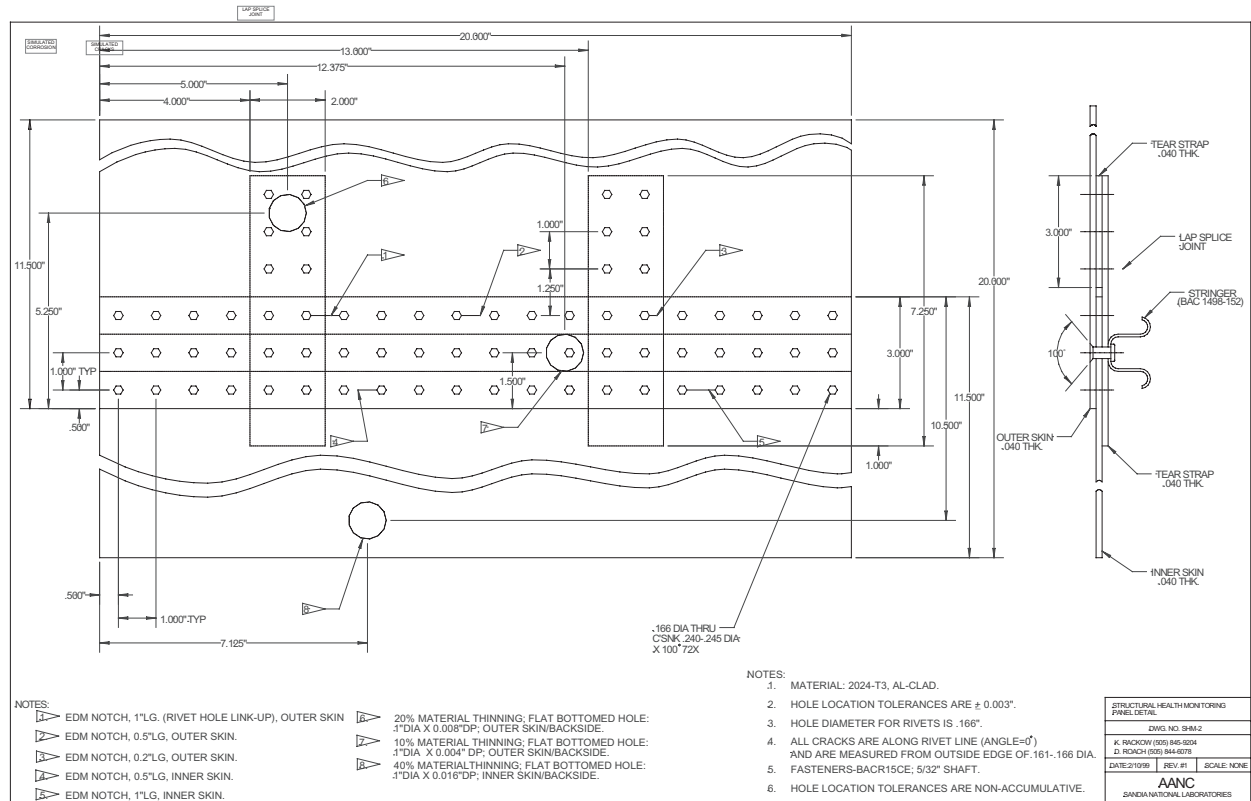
Realistic aging aircraft lap-splice joint panel with simulated cracks (EDM slits) and corrosion (chem-mill areas).
